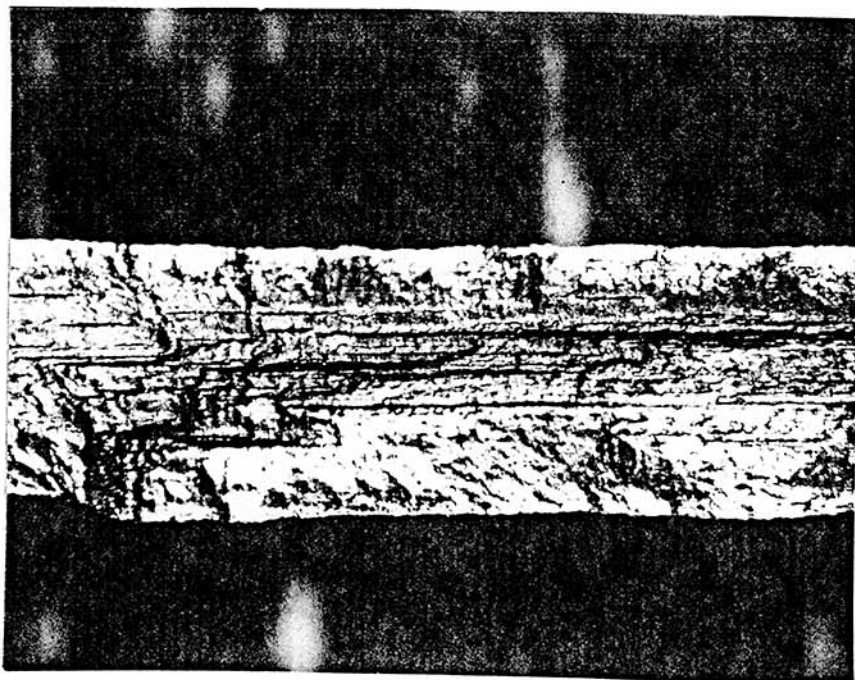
Closeup of fracture surface showing layered effect due to preferential cracking. Magnification: 20 X.
